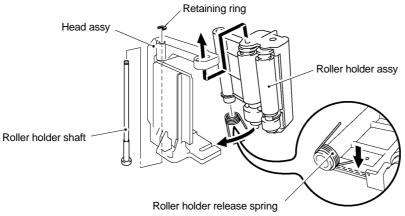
Reassembly of the Roller Holder Assy
